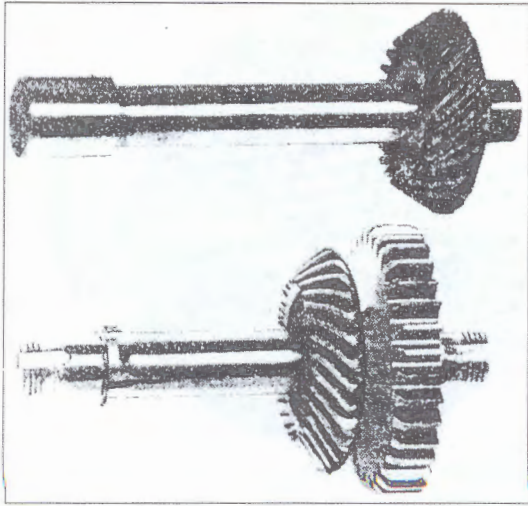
Gears of steel 18Kh2NMA for ship power units welded by EBW
